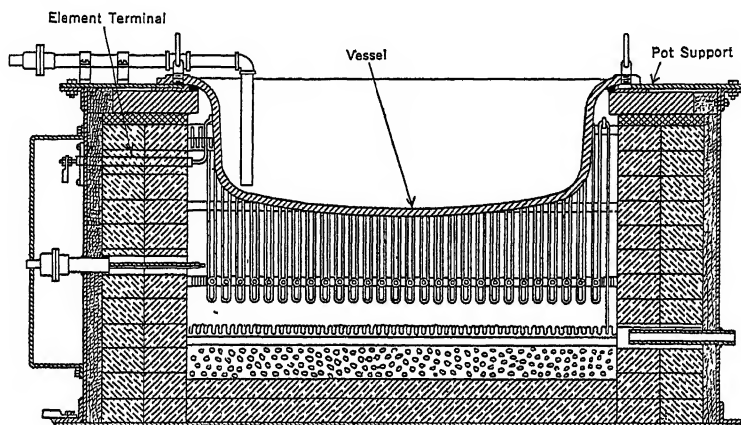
Sectional View of Rectangular Pot-type Furnace
